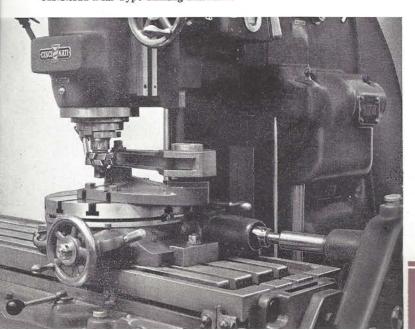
16" Circular Milling Attachment Arranged for Hand Feed.
